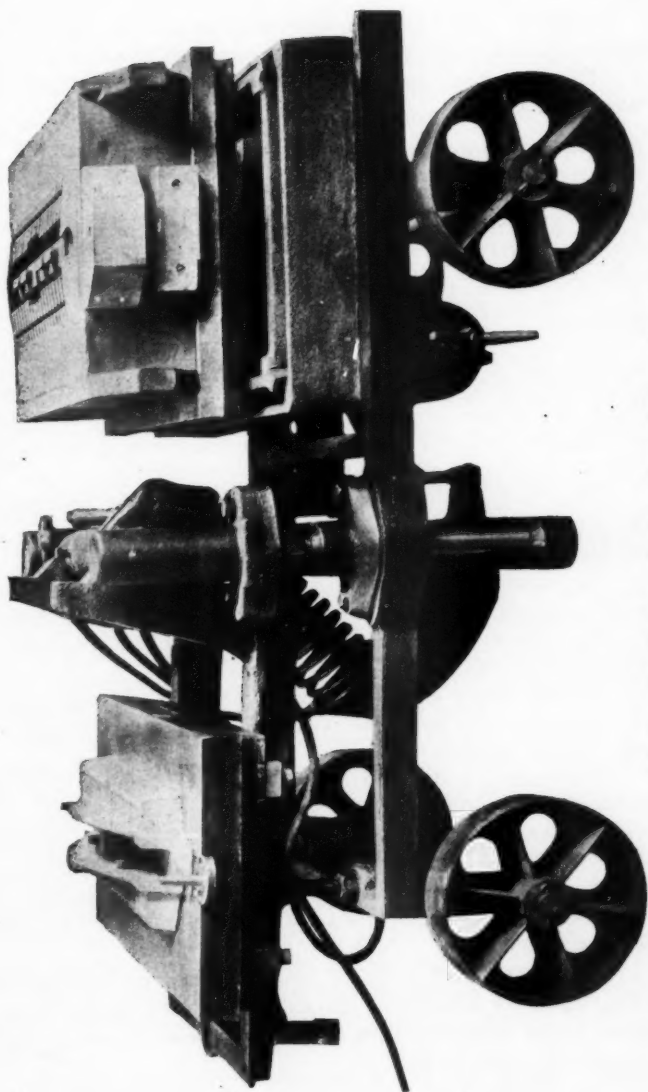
GRATE BAR ON TABOR ROLLOVER MACHINE.
